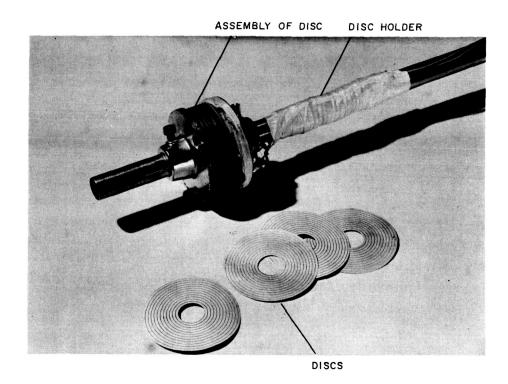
DISCS AND ASSEMBLED CONCENTRIC RING STACK
